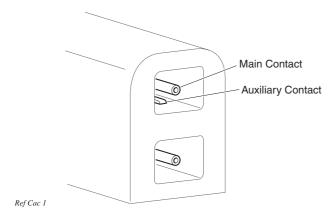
Cleaning Auxillary Contact in Charger Plug
